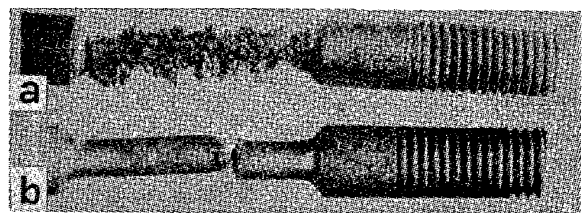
Stringy defect on 25% Cr-Ti steel tube extruded.
